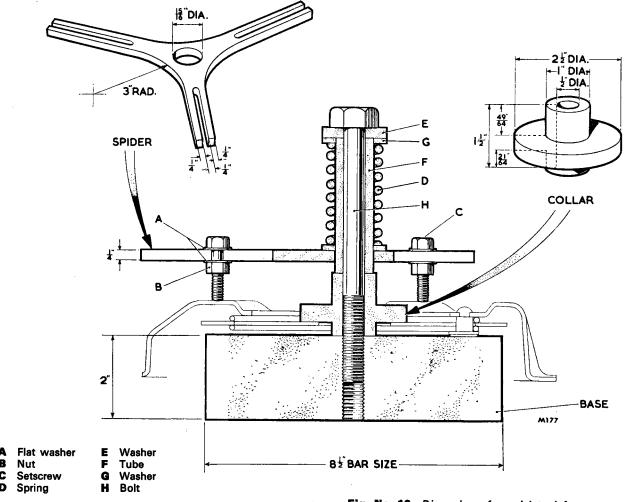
Dimension of special tool for compressing the diaphragm spring when rivetting the spring to cover pressing.
